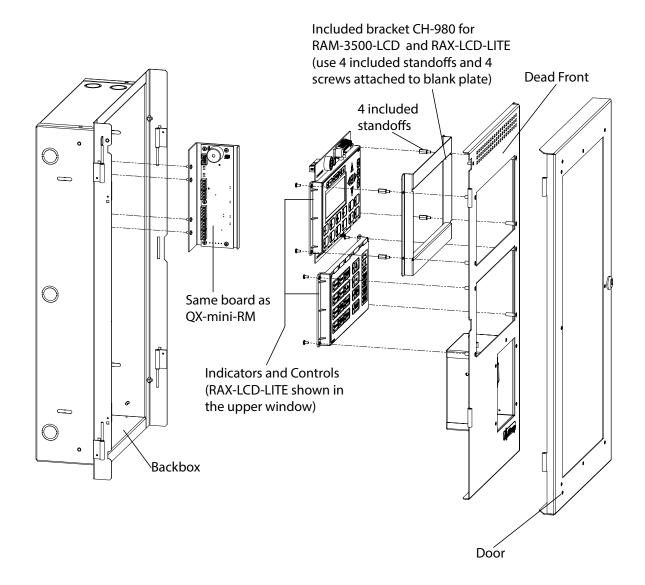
Exploded view of QX-mini-LOC showing mounting of RAX-LCD-LITE
